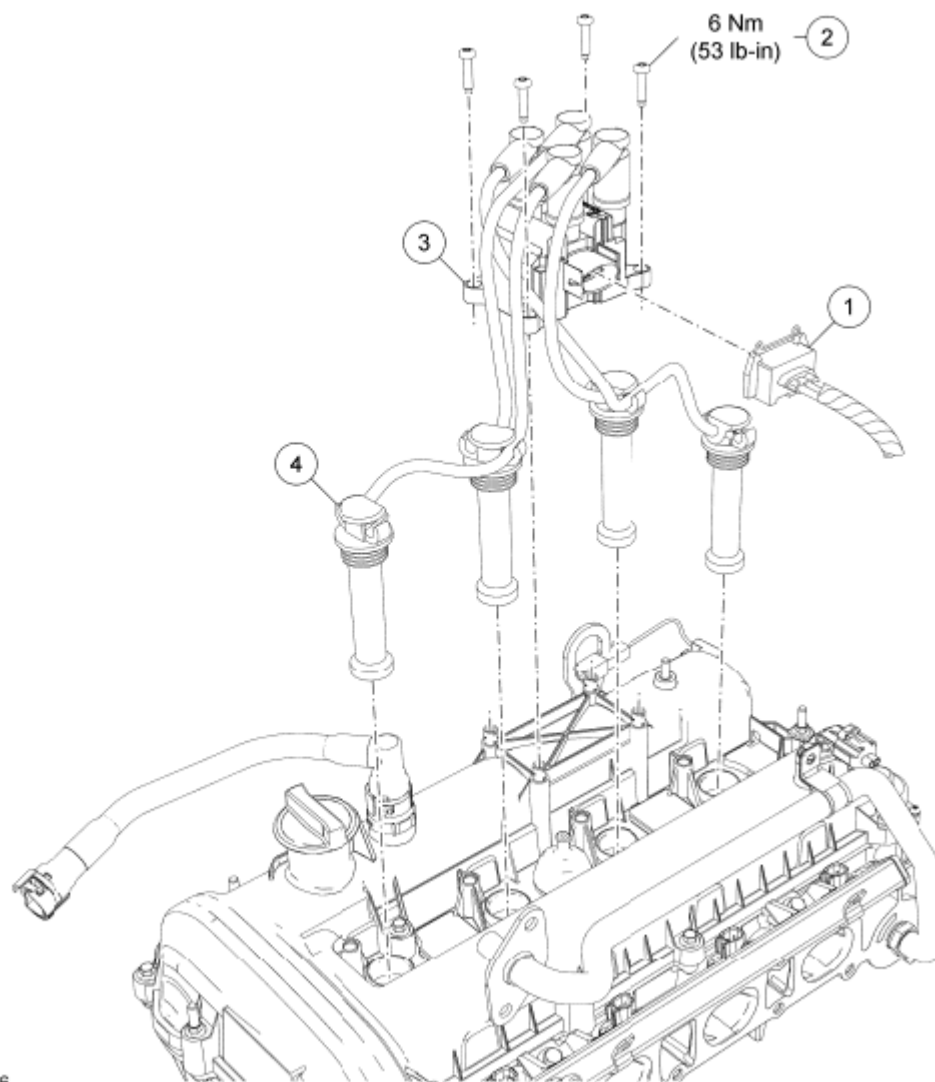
Identifying Valve Cover Components With Torque Specifications - Ignition Coil And Wires
